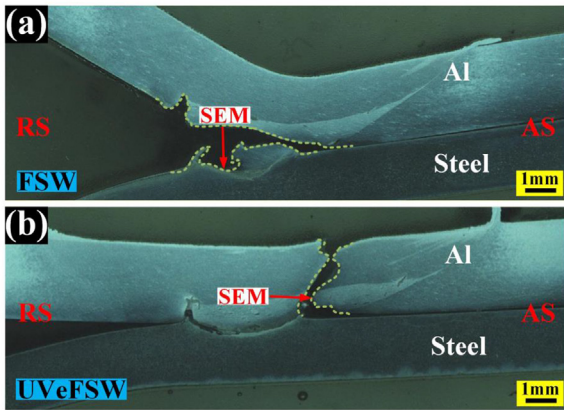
Fracture location of tensile shear specimens: (a) FSW, (b) UVeFSW (800–25).
